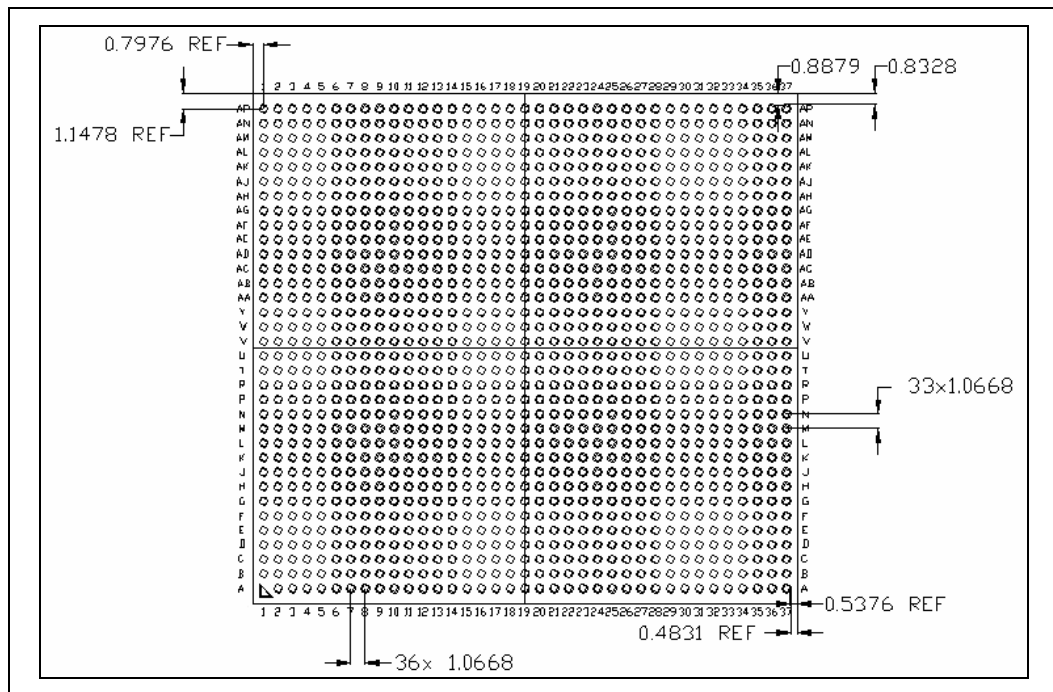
Mobile Intel 915PM/GM/GME/GL and 910GMLE Express Chipset Package Top View
